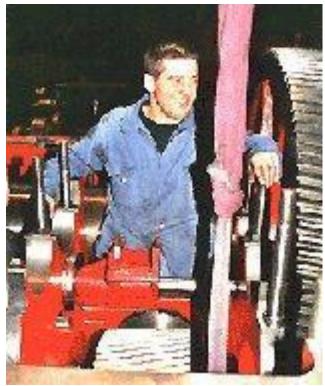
The size of the headstock is impressive. The whole reconstruction with the revision, lasted all in all, less than 6 months. After delivery no guarantee had to be made. The machine was run continuously after start-up, without interference.
